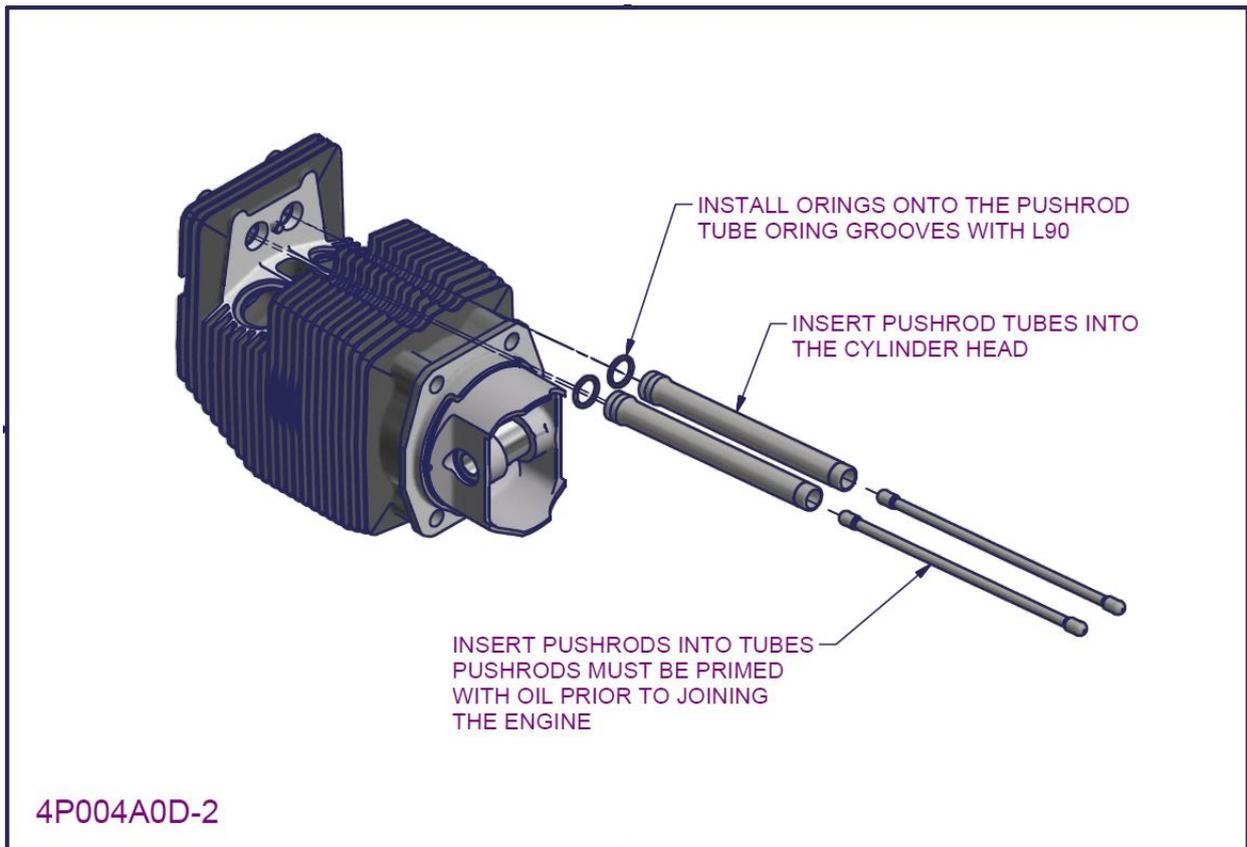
2200/3300 cylinder assembly 10a (external O-ring groove cylinder head)
